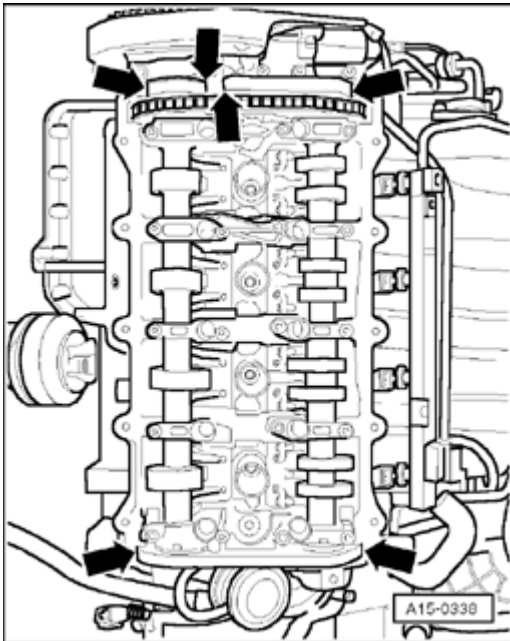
Applying Thin Layer Of Sealant To Edges Of Sealing Surfaces Between Bearing Cap And Cylinder Head
